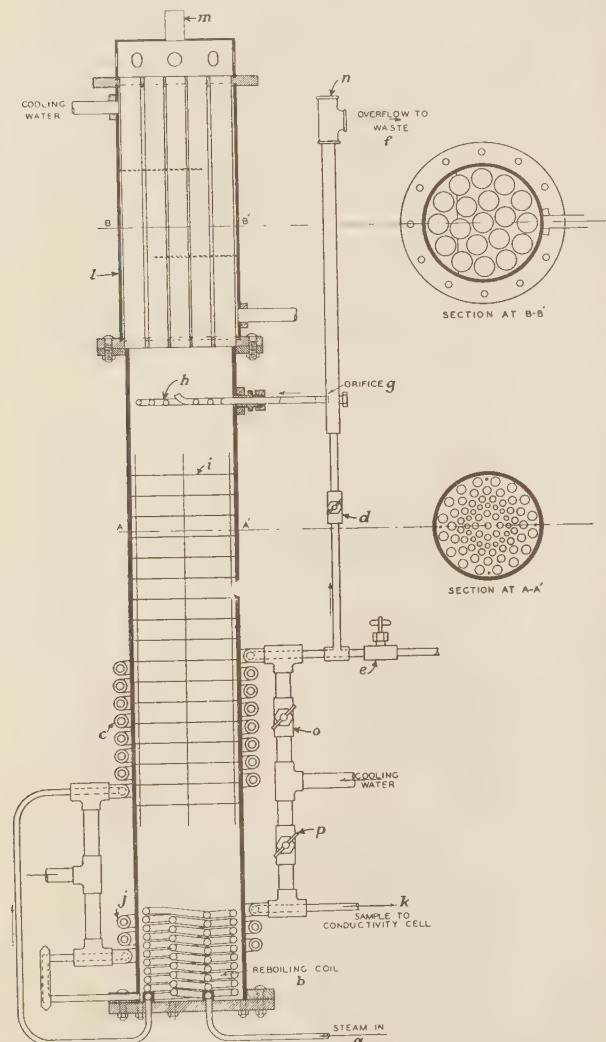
DEGASIFYING STEAM CONDENSER DEVELOPED AT UNIVERSITY OF ILLINOIS
